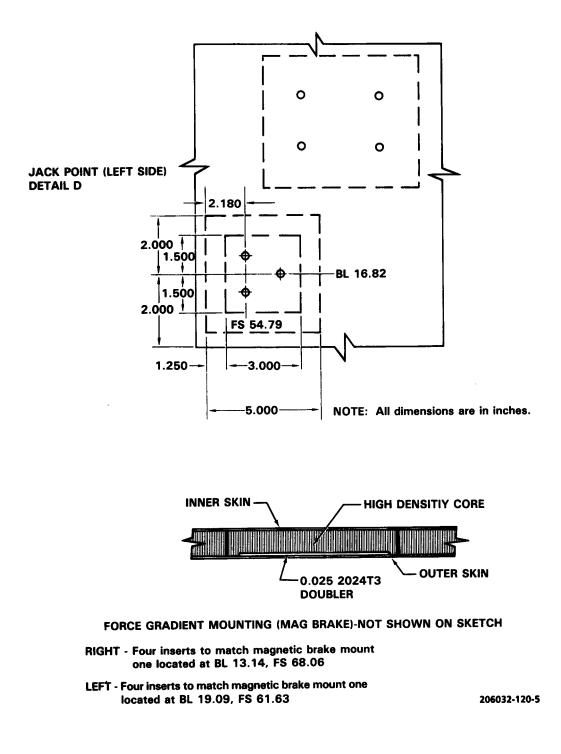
Honeycomb Panel — Forward Lower Cabin Shell Repair (Sheet 5)
